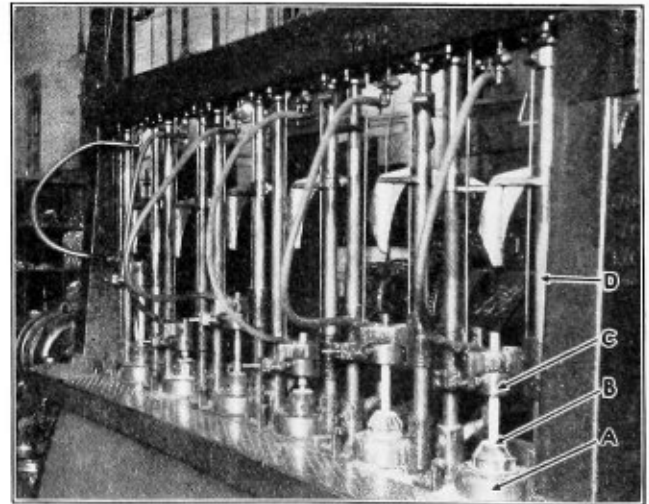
Cutting the threads on three different sizes of staybolts on a six-spindle threading machine
